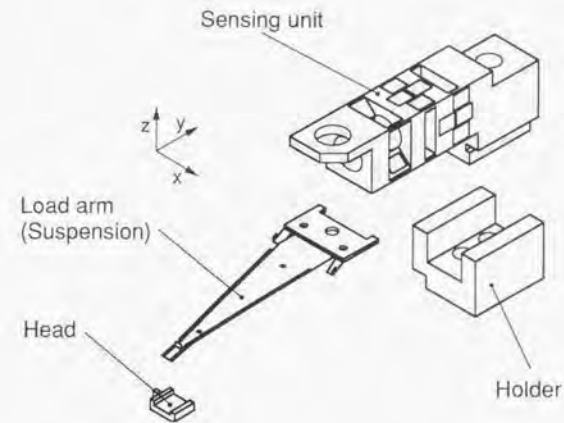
5-axis force sensor for head of magnetic disk drive
